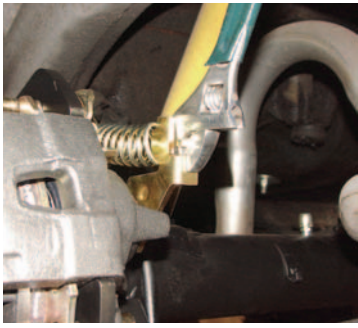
& 8b: The outer disc brake bracket bolts to the inner bracket with four 3/8" X 2" bolts. The outer bracket bolts to the inside of the inner bracket and has four spacers to properly align the caliper with the rotor. Torque these bolts to 35 ft/lbs.
